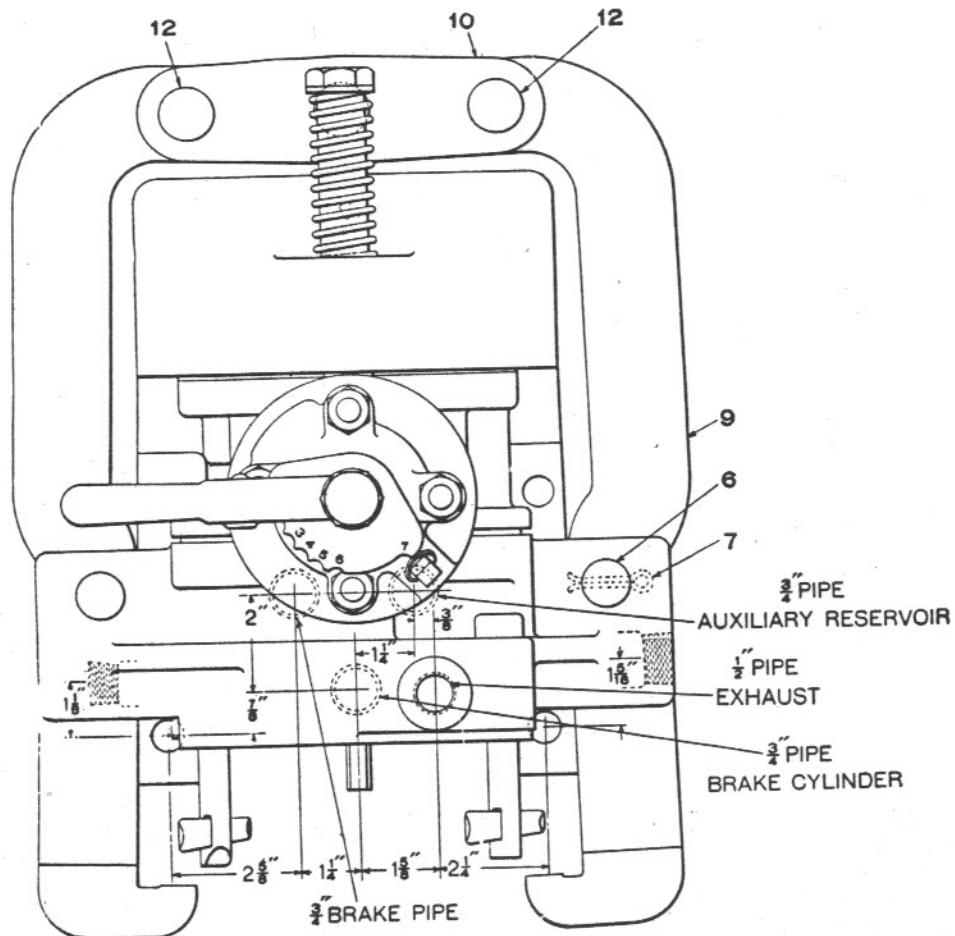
Top View Triple Valve Stand Showing Operating Valve "R" Handle Positions
